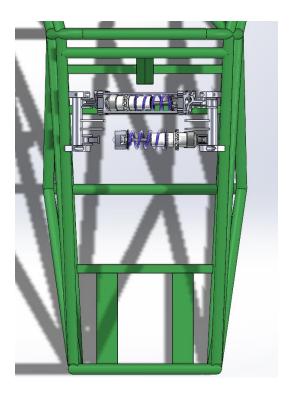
Image of the CAD model of the top plane of the design mounted into the chassis
